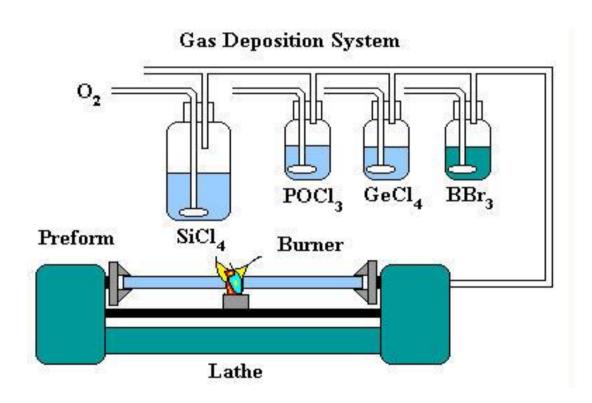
Explains the layout of the fiber manufacturing machine.
